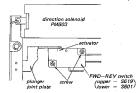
FWD/REV switch (S601, 619) position adjustment
